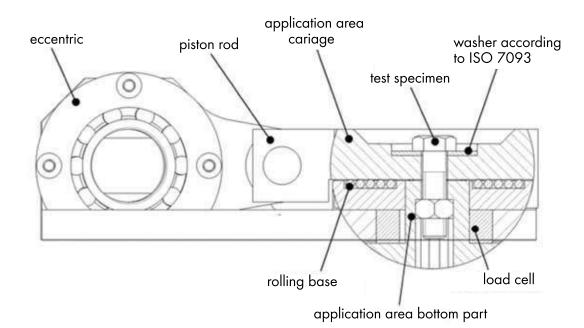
Sectional drawing Vibration test bench according to DIN 65151¹
